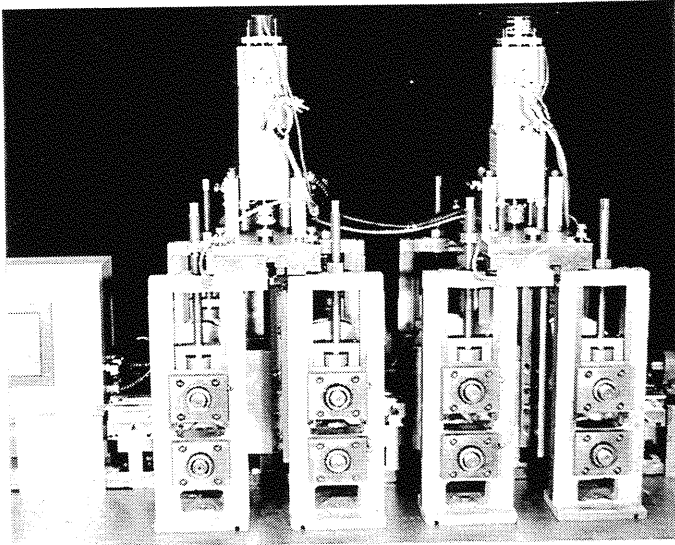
(1) 4 tandem cold roll forming machine providing control equipment of roll width
